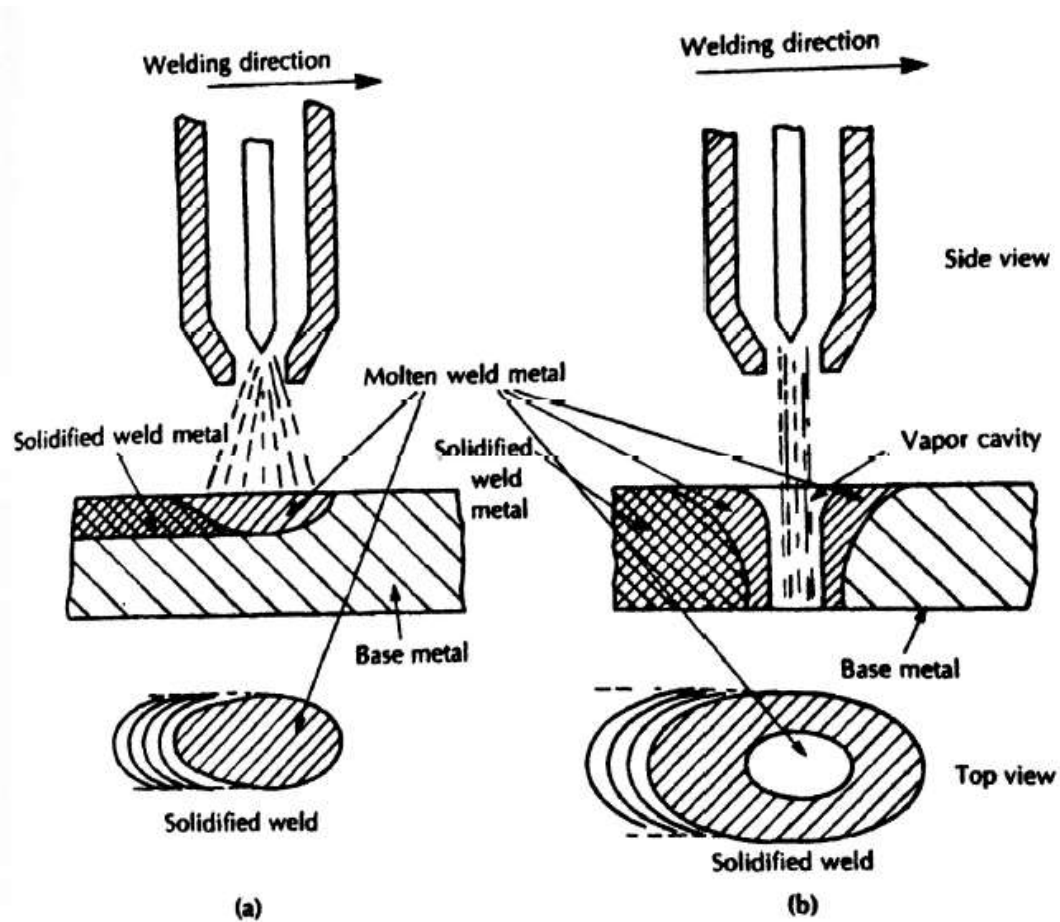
5 Plasma Arc Welding: (a) Overall Process (b) Schematic [3]
